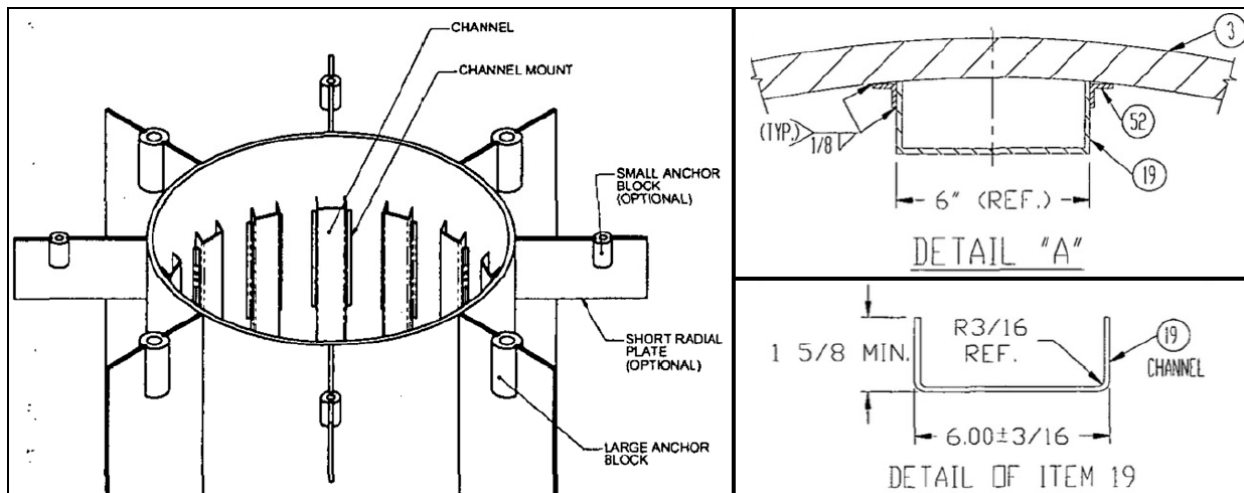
Section view of top of MPC to overpack gap from Holtec drawings.
